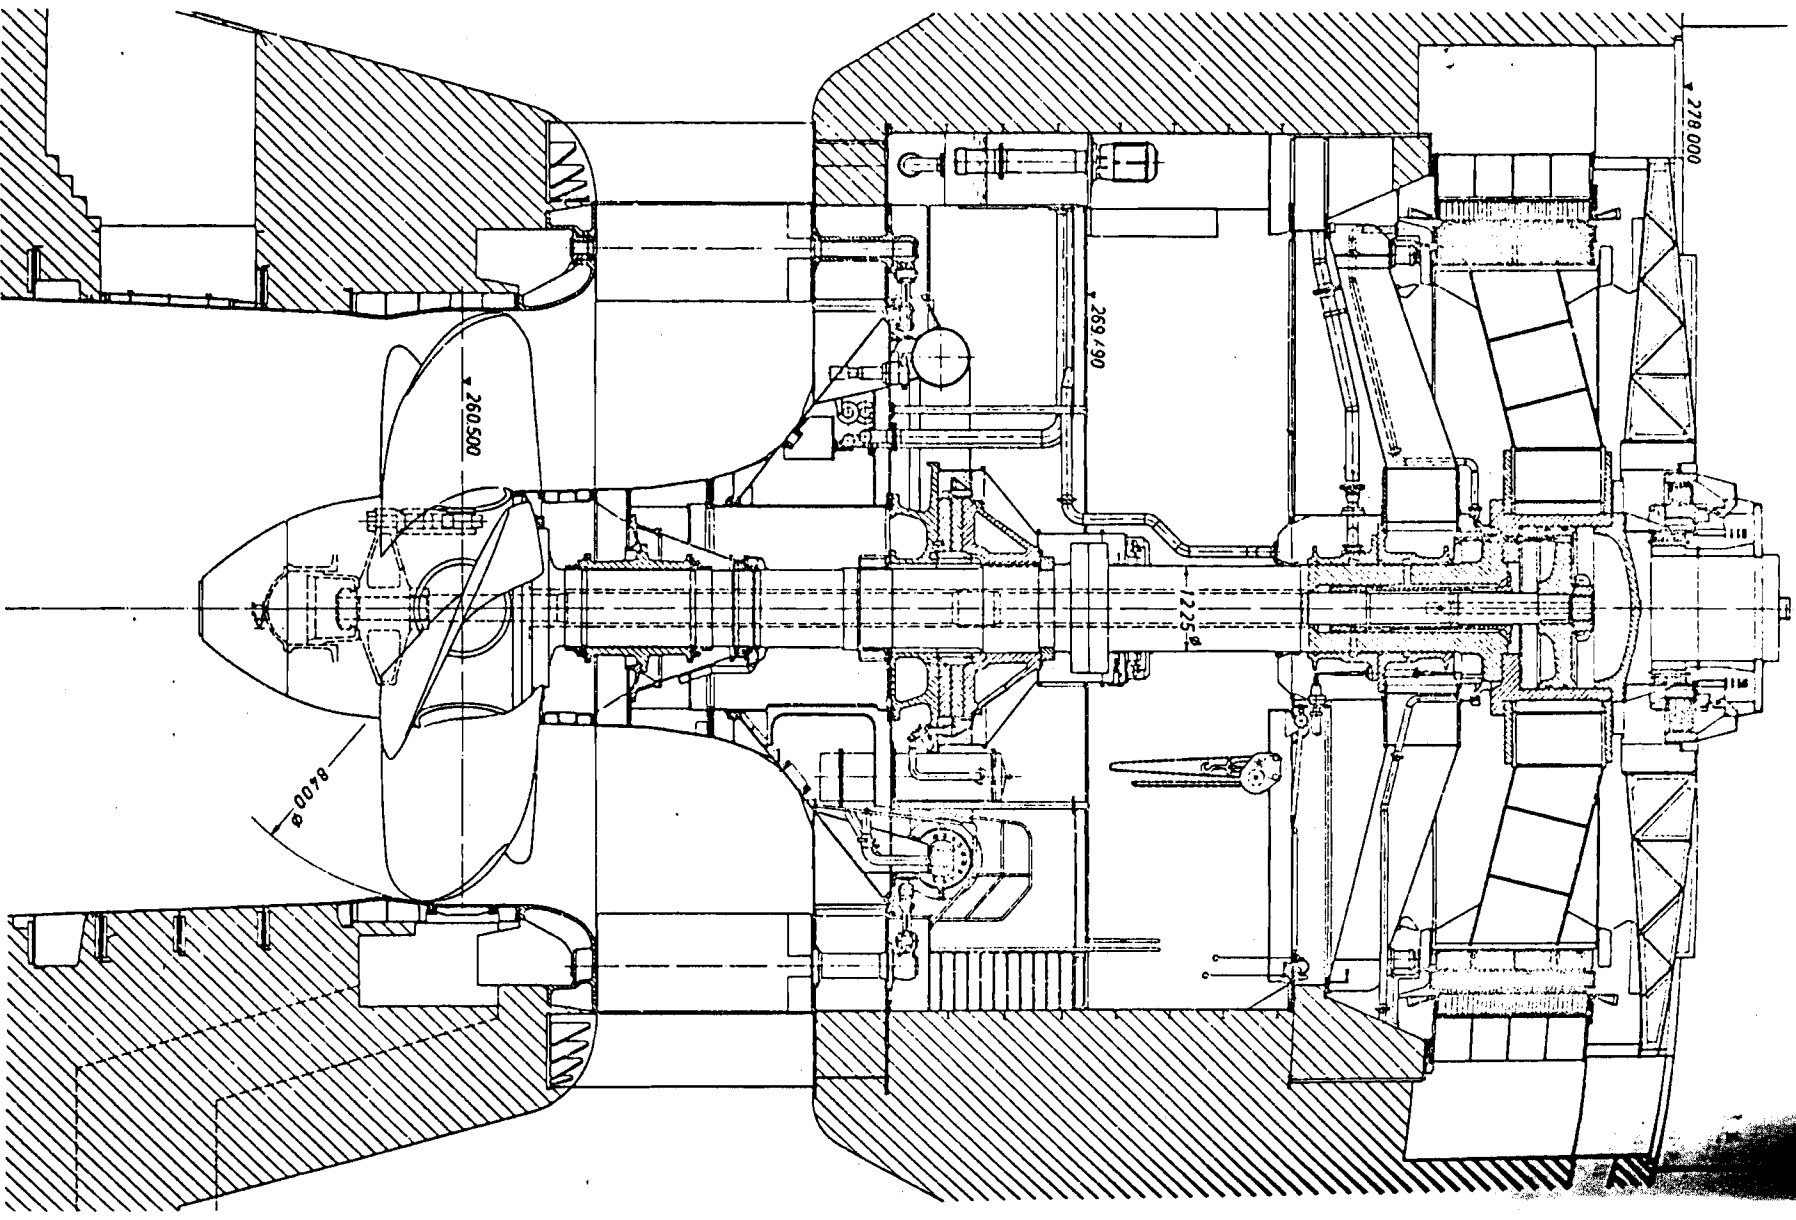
Sectional view of the KT, Aschach, Danube, Austria (owner Österreichische Donaukraftwerke AG). 2 guide bearings, 2 rotor masses of turbine runner and alternator rotor with overhung design. Thrust bearing between the guide bearings does no essentially influence the shaft deflection. Design *Voith*. (2 sets of Aschach built by Escher Wyss and Andritz are of similar design.) Data: $H = 15$ m, $n = 68,2$ rpm; $P_r = 66$ MW; $P_m = 75$ MW. Runner 5 blades $D = 8,4$ m (largest runner diameter of KT in Western Europe) 12 welded stay vanes, concreted at lower end, carry the welded crown of the stay ring, concreted on its outer part. A welded head cover supports the thrust bearing by means of a welded connection of a ring plate, a truncated cone and a cylindrical shell. This also carries the lower guide bearing, the gate operating ring and its 2 pairs of toroidal servomotors exerting only a couple on the ring. Removable inserts facilitate dismantling of the individual gates. Runner with 5 blades of 13% chromium steel, 2 part shaft, runner servomotor in the hub of the alternator rotor. Upper guide bearing also used as oilhead. Throat ring welded and embedded in the concrete. Draft tube lining welded on the throat ring with stiffening rings and iron ties. Revision of the runner through a door in the concrete of the semi-spiral cone. (Drawing courtesy *Voith*.)
